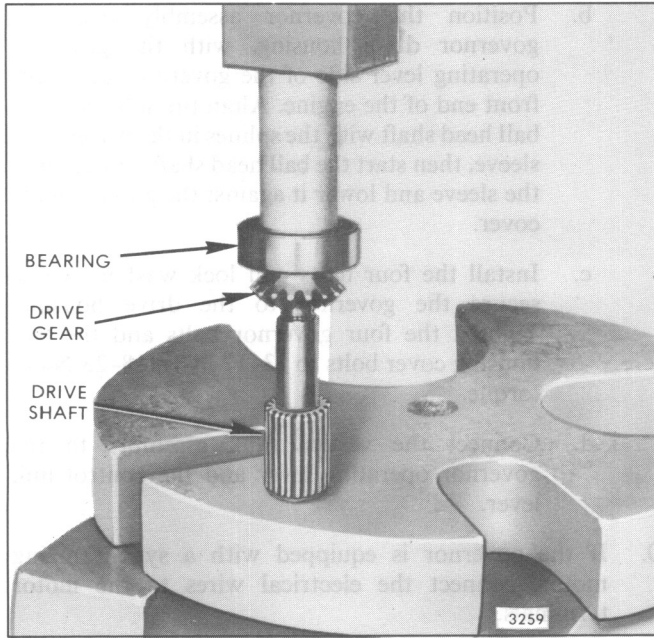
Installing Drive Gear and Bearing on Drive Shaft
